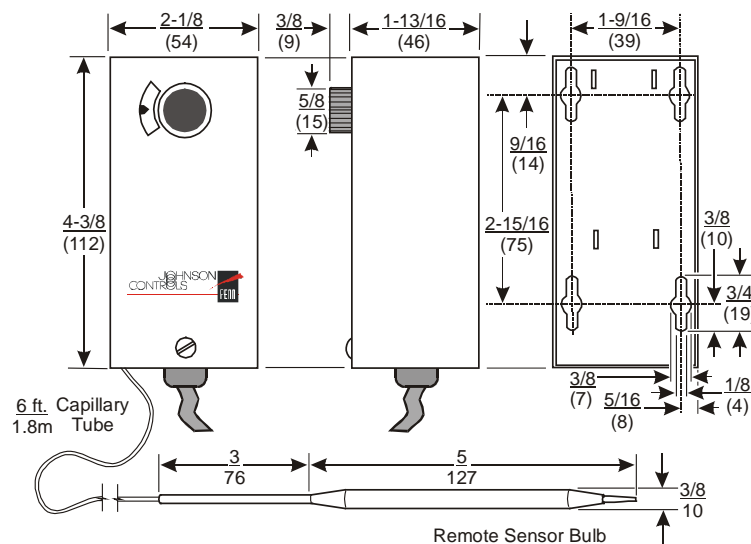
A19AAT-2C Model Thermostat Dimensions, in. (mm)
